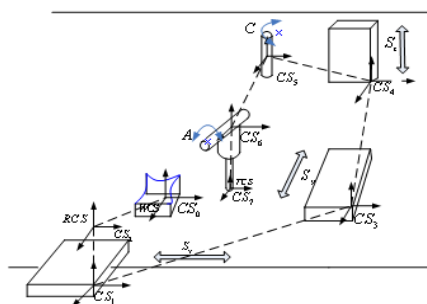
The coordinate scheme of the five-axis gantry machine tool[6]
